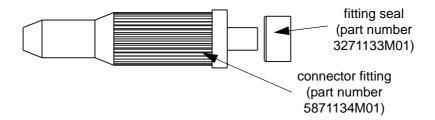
Connector Fitting - Fitting Seal Pump Connector
